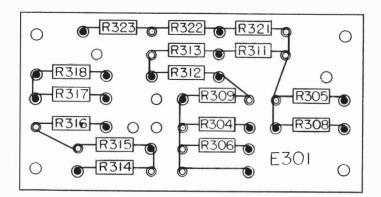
Frequency Shift Converter CV-89A/URA-8A, Components Mounted on Terminal Boards
